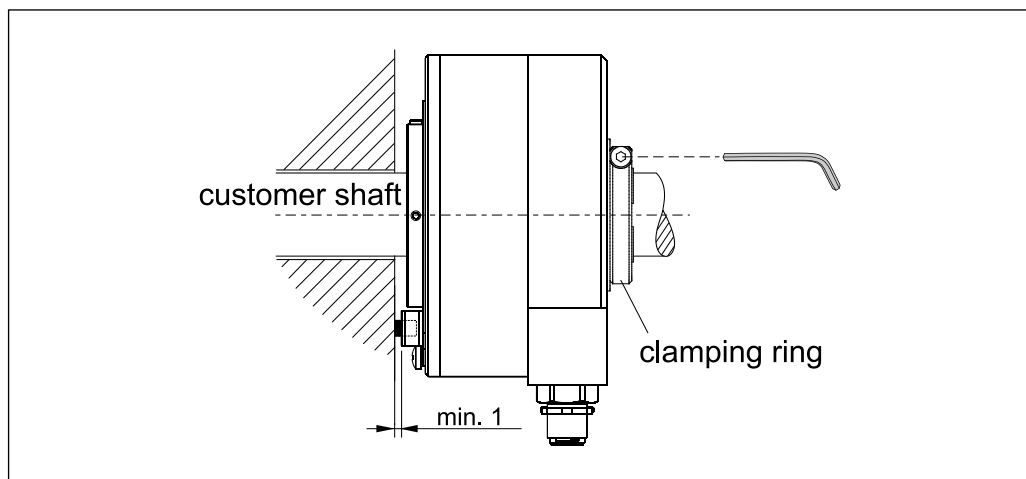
Type with dowel pin and spring torque holder in assembled condition with  $\varnothing 25H7...40H7$
